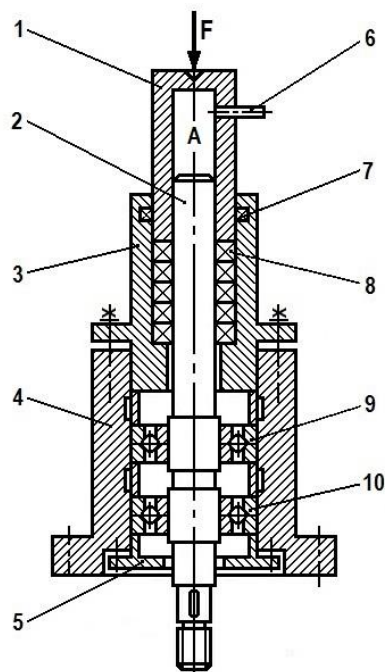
Device to simulate the working of a stuffing box: 1 – gland; 2 – shaft; 3 – cylindrical housing; 4 - bearings housing; 5 – lid; 6 – connecting pipe; 7 – O-ring; 8 – packing rings; 9, 10 – bearings.
